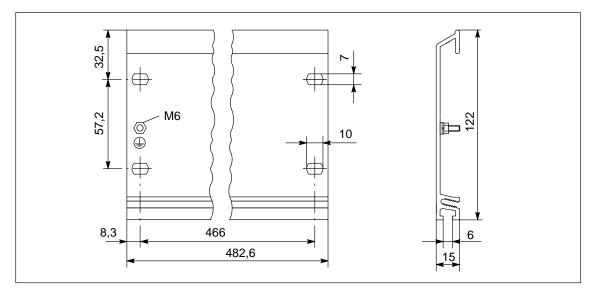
Dimension Drawing of the Rail with 482.6 mm Standard Width
